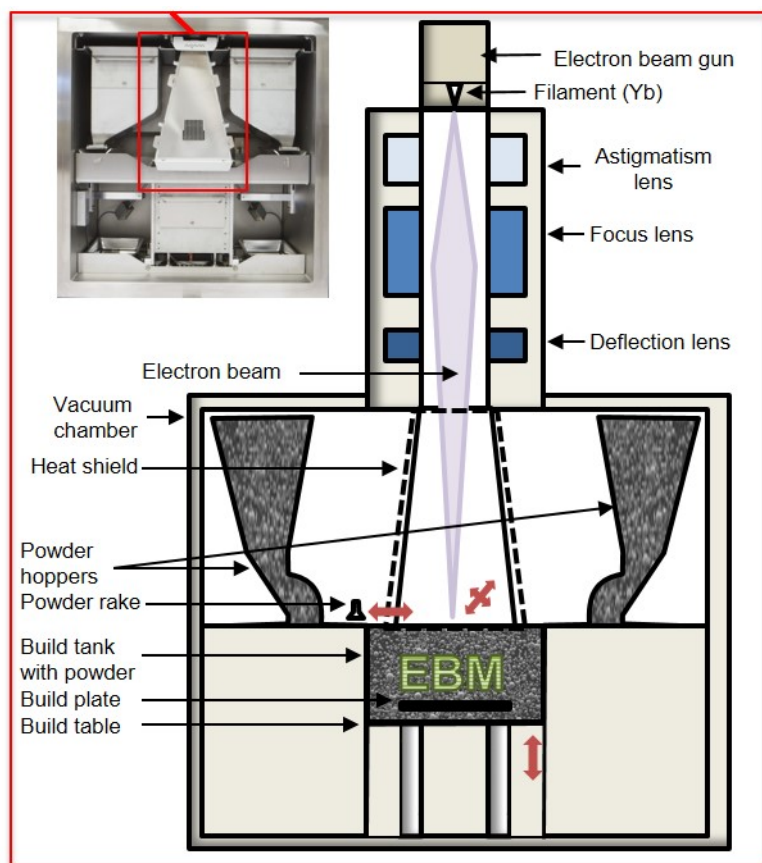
Schematic of EBM machinery showing electron gun assembly, EB focusing lens, EB deflection lens, powder hoppers, powder (layer) rake, build-in-progress, and build table, with photo of representative EBM machine.
